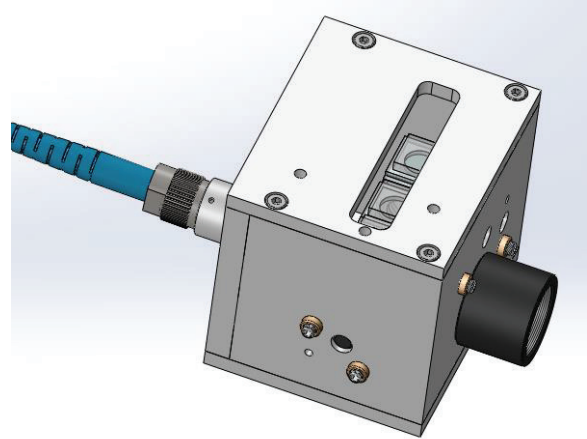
CAD image of 3-axis probe completely assembled. Clearance slot for the optical sensors can be seen on the top cover.
